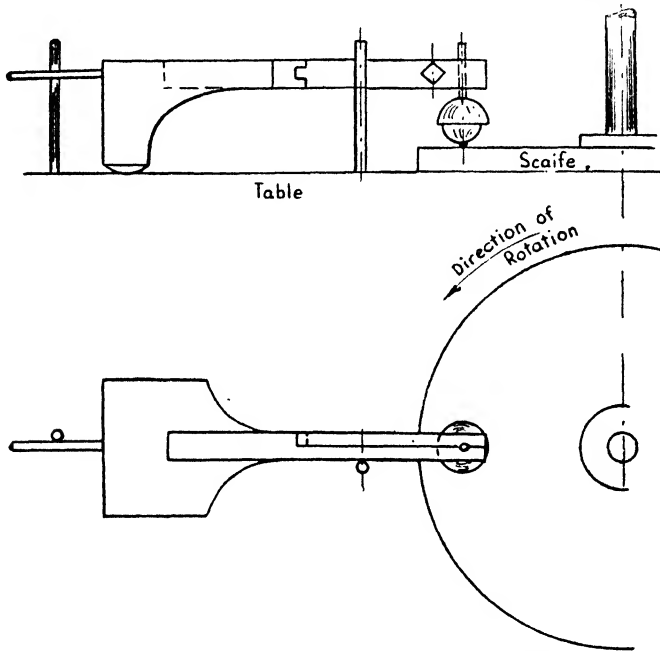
Arrangement of the usual diamond cutters tang on the wheel, inclusive stops
